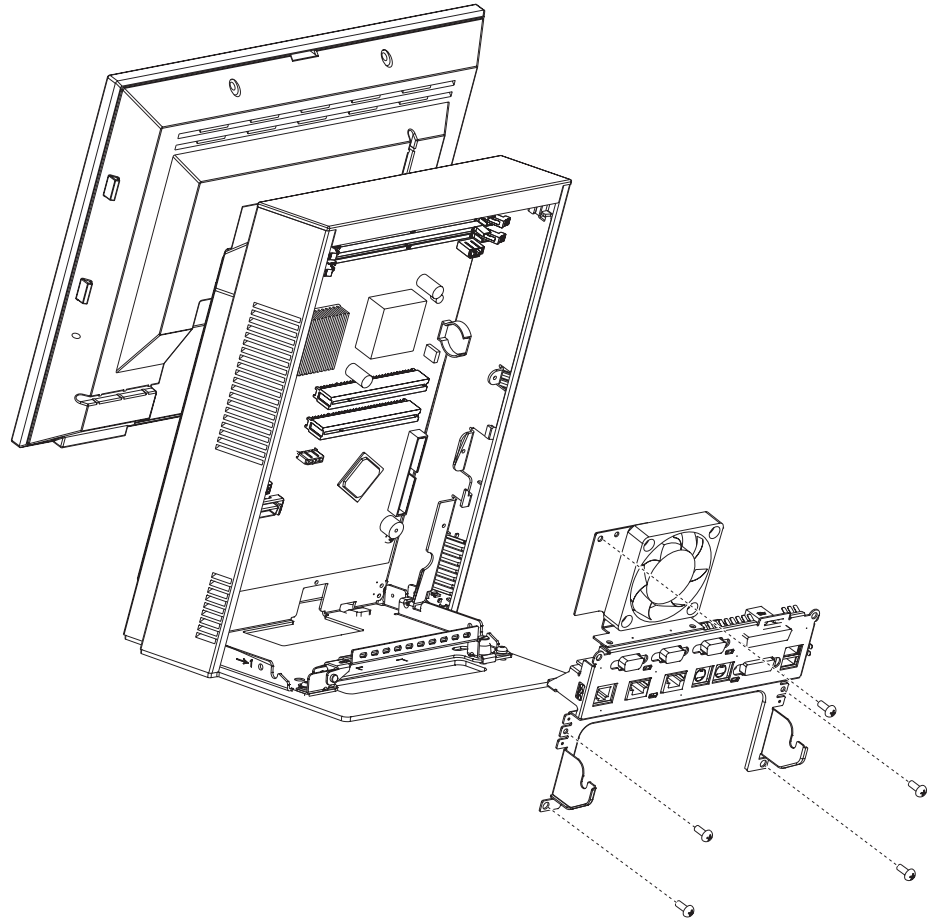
Tailgate remove and replace. This figure shows the screws removed for illustration purposes only.
